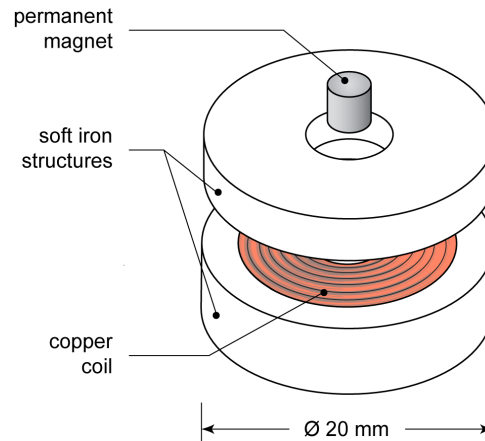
Electromagnetic actuator: 3D assembly of the soft iron parts with permanent magnet (E-type actuator-actuator II).
